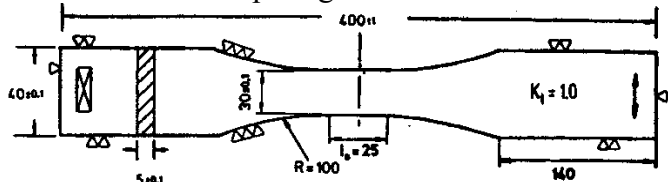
Specimen for fatigue testing of laser welds.
